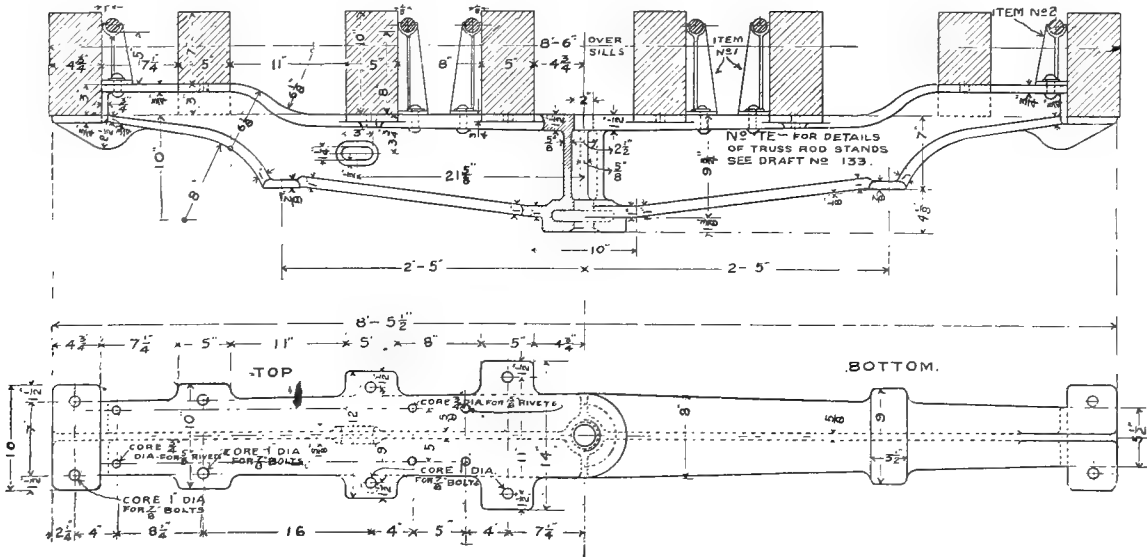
Cast Steel Body Bolster for Wooden Gondola Car. American Steel Foundries.
